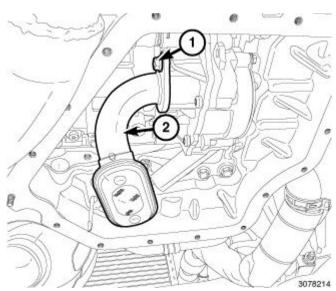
Oil Pump Pick-Up Tube & Bolt Courtesy of CHRYSLER GROUP, LLC
